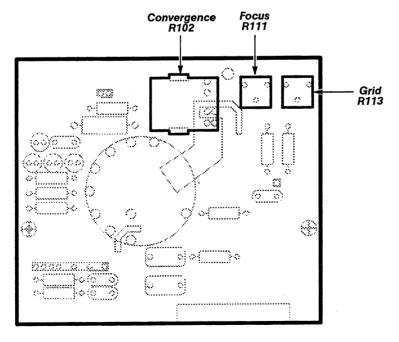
A27 CRT Socket Board Adjustment Locations
